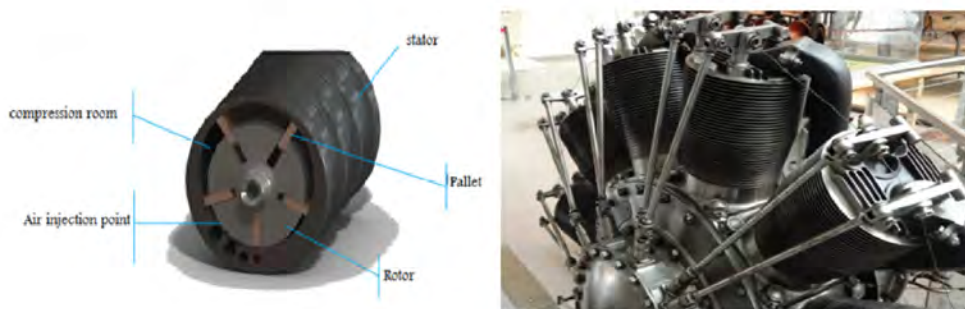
Schema of compressed air motor with piston (right) and compressed air motor with (left)
